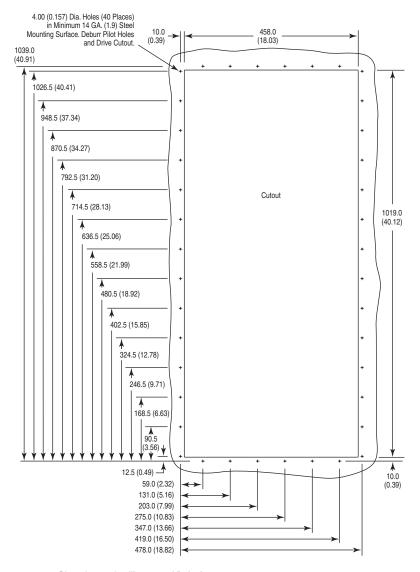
Frame 5 NEMA/UL Type 12 Flange Mount (400-690V drives only)
